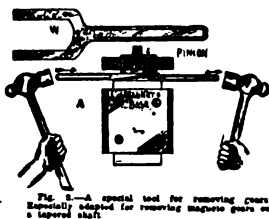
A special tool for removing even specially adapted for removing magneto gears on a tapered shaft.
